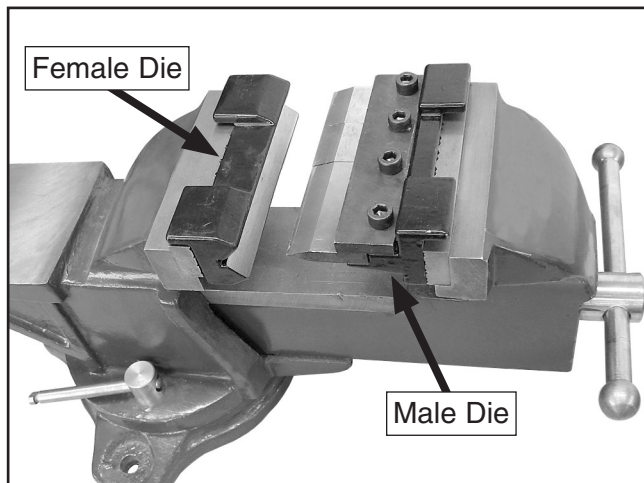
Example of vise brake mounted on a bench-top vise (Model H3243 shown).
